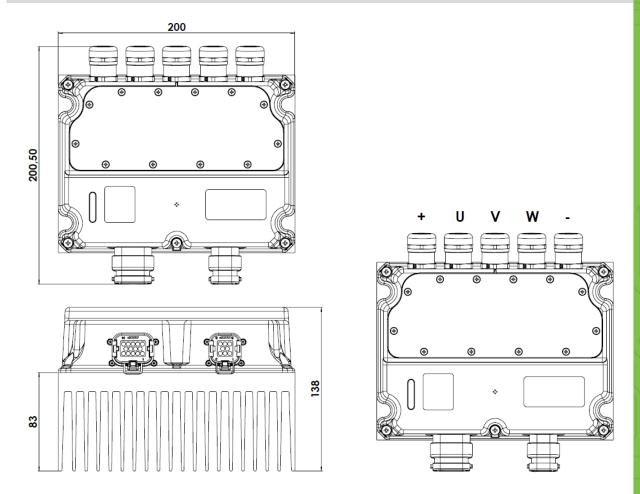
emDrive H100 Air cooled version dimensions and connection order
